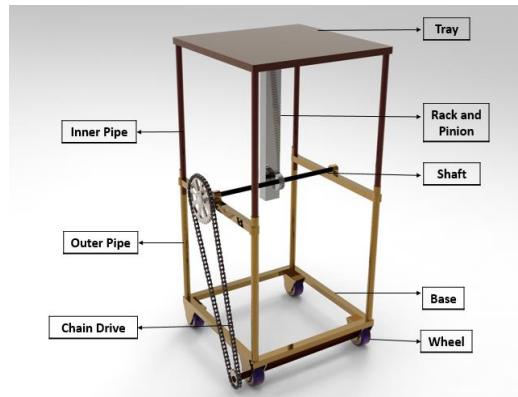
3D view of Self-Weighted Material Handling Equipment designed by SOLIDWORKS
